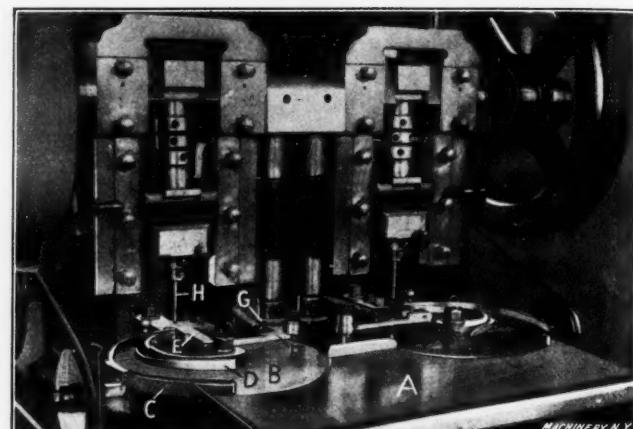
Double-headed Friction Dial Drawing Press used for the Various Drawing Operations
